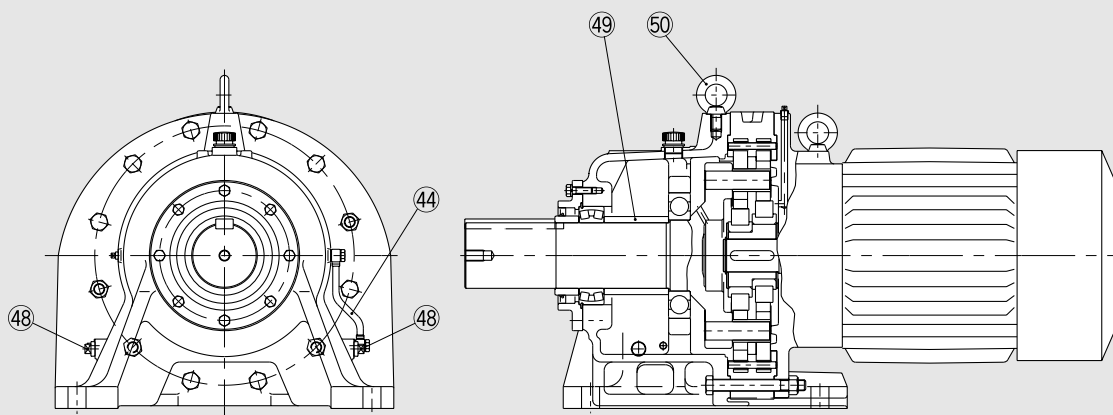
Type CHHM (Horizontal-Gearmotor)
